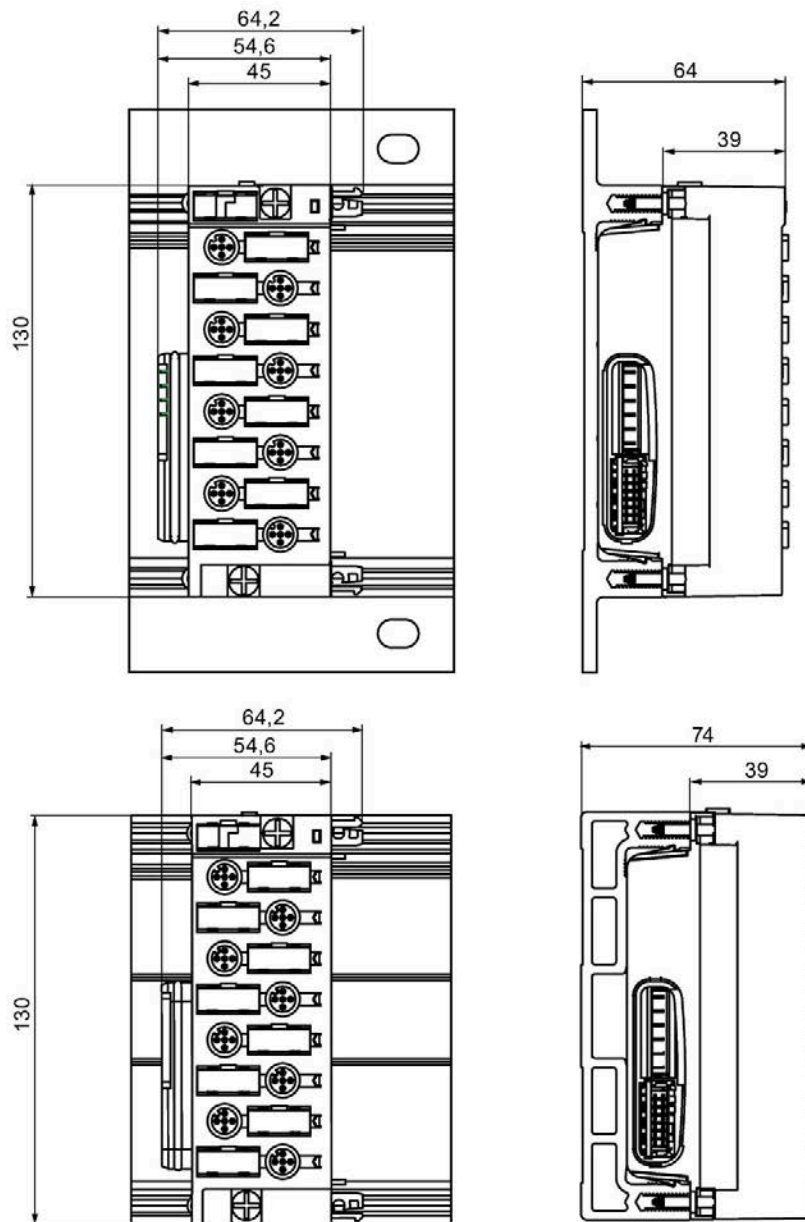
Dimension drawing of an electronic module with CM IO 8 x M12 connection module
